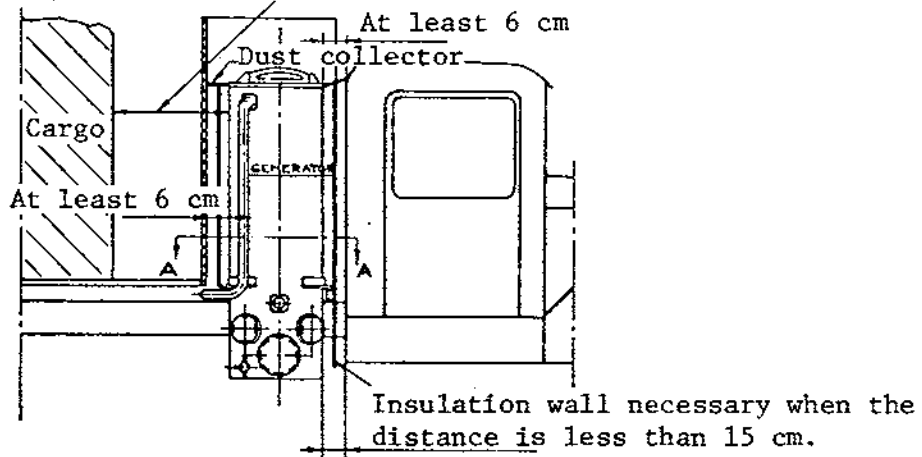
Assembly of a Wood Gas Generator for a High Cargo. (Hesselman Motor Corporation)
